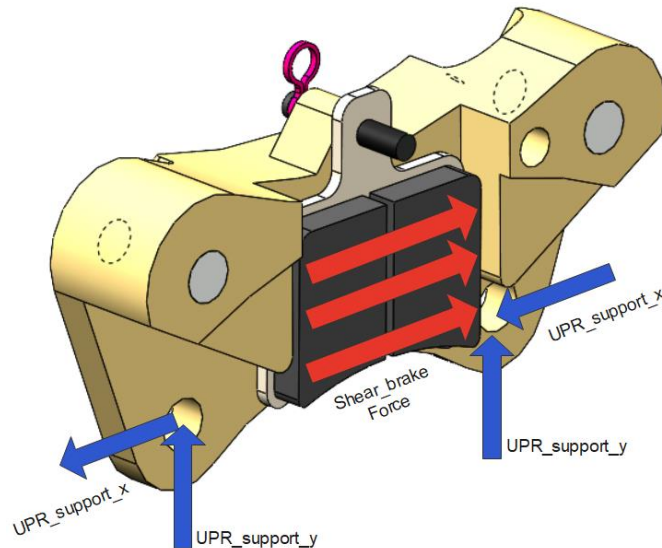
System cutaway FBD showing external forces on calliper system (resultants not shown).
